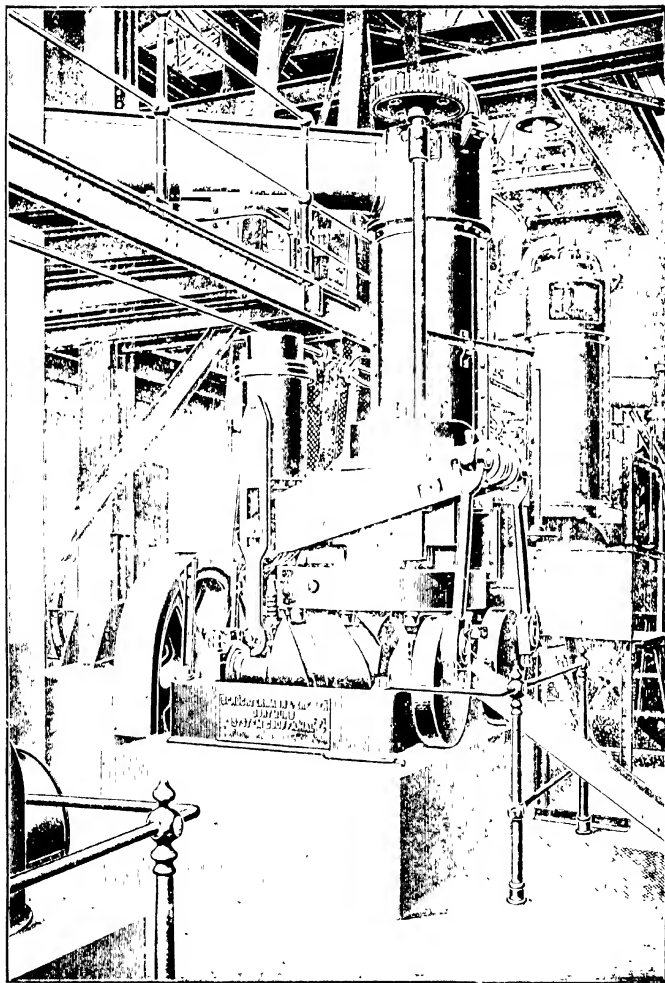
Continual press with steam kneader by Schuchtermann & Kiemer
